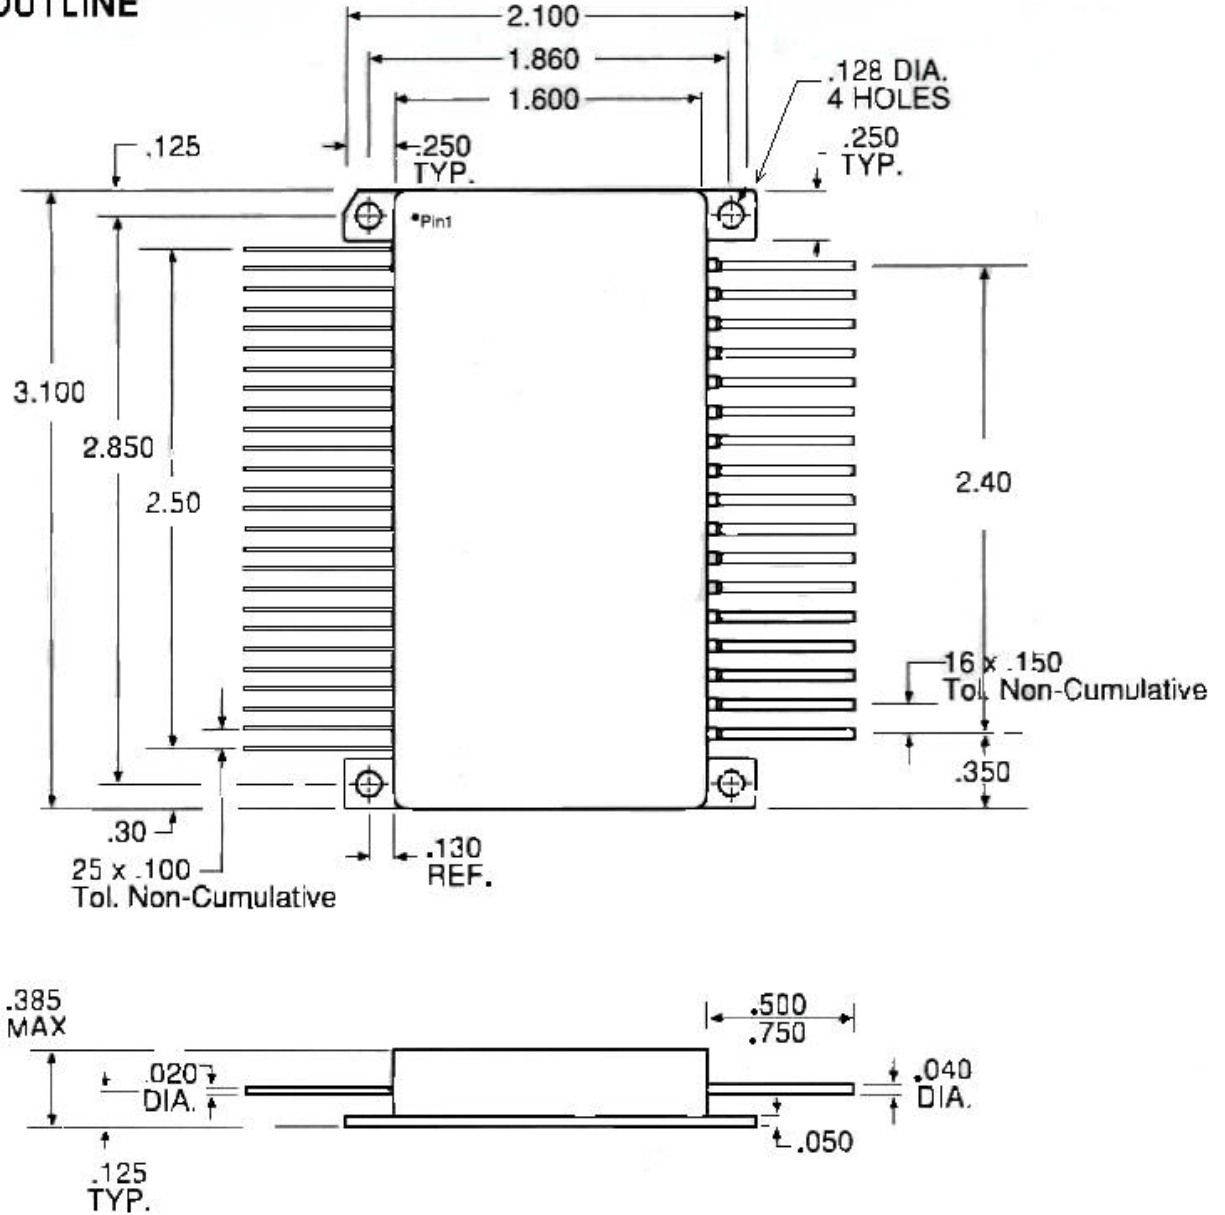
Mechanical Outline For Hermetic Package, SMC6MXX-XX
